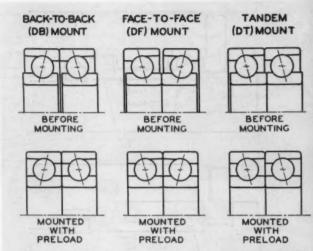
Three basic mounting arrangements for ball bearings. In preloading, they are clamped together, bringing both inner and outer rings into alignment. The initial offset between these ring faces therefore determines their design preload.
